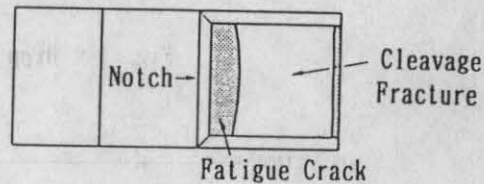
One example of fracture surface of ITCT specimens after dynamic fracture tests (SFVC 2B)
